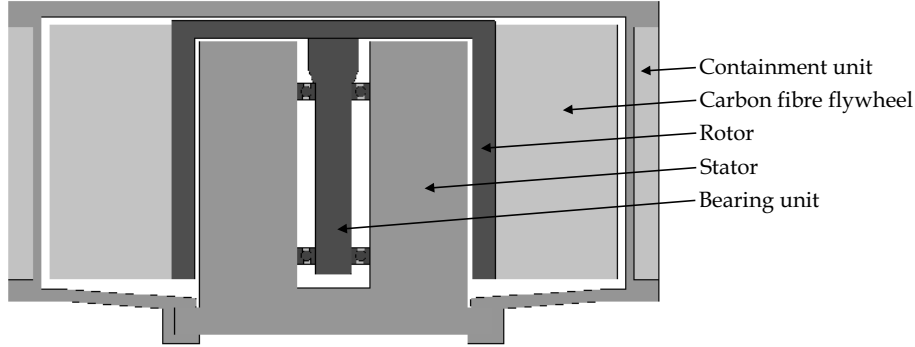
An axial cross section of the complete flywheel and electrical machine.
